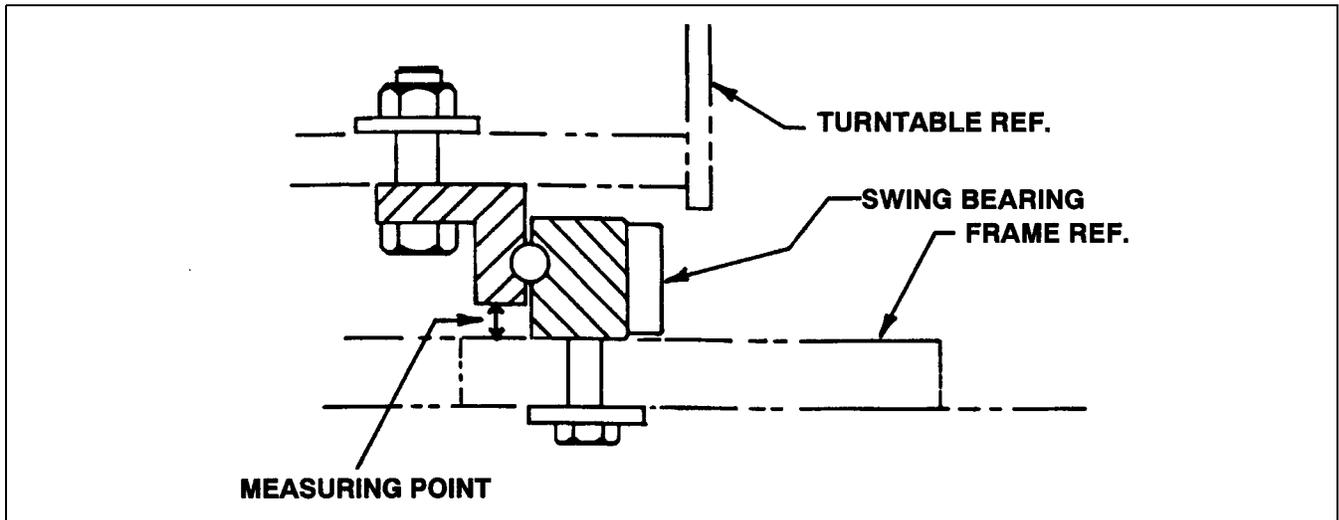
Swing Bearing Tolerance Measuring Point.
